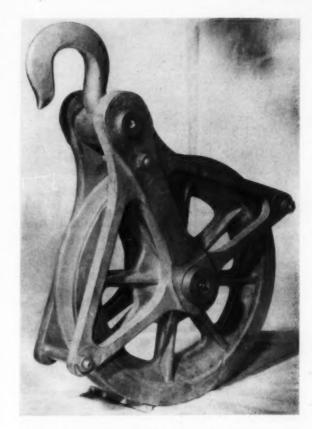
Diamond drill sheave with cast iron insert in cable groove.
